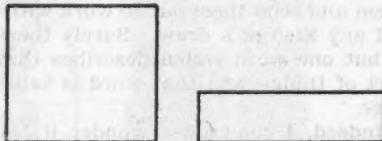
Assuming that these drawings represent two pieces of steel, the smaller one will heat and cool faster than the larger one, and also will be harder.
